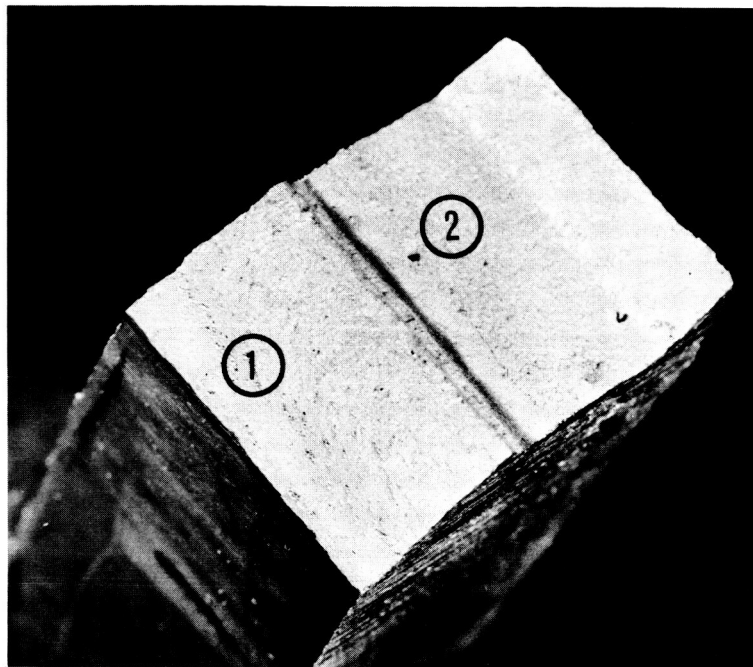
PATH OF FRACTURE IN WELD METAL
